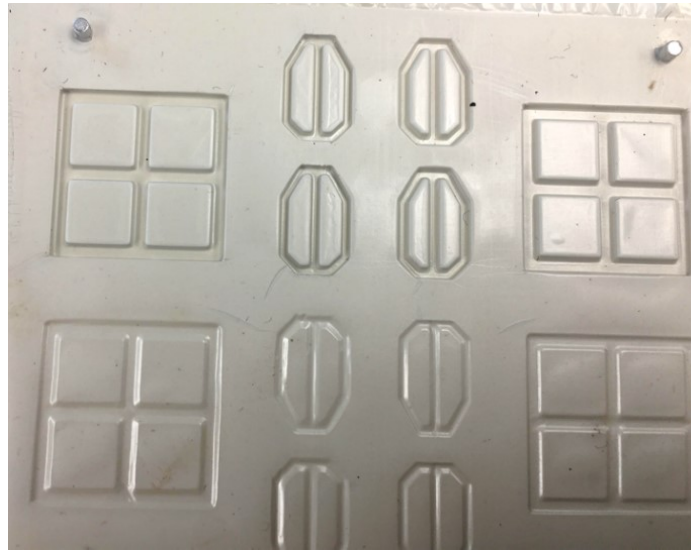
LCP sheets thermo-pressed by a metal jig used for the packaging of the relay coils.
